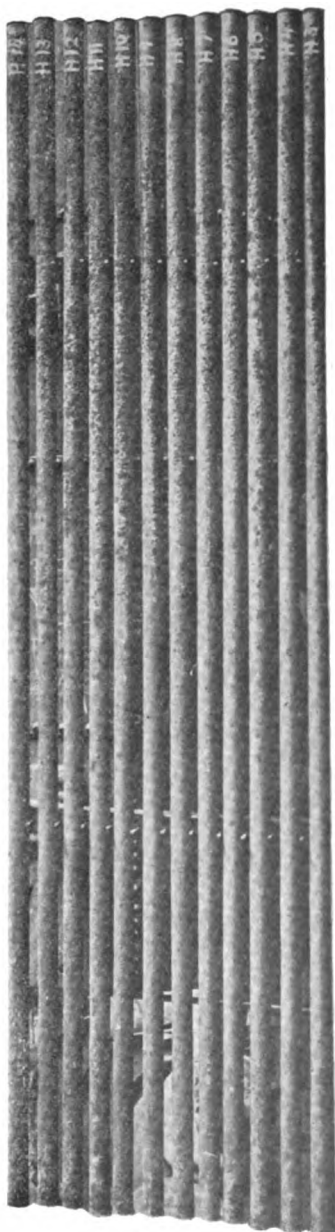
APPEARANCE OF TUBES, BOILER No. 4084, AFTER DISMANTLING. HORIZONTAL ROW H, EIGHTH FROM TOP
